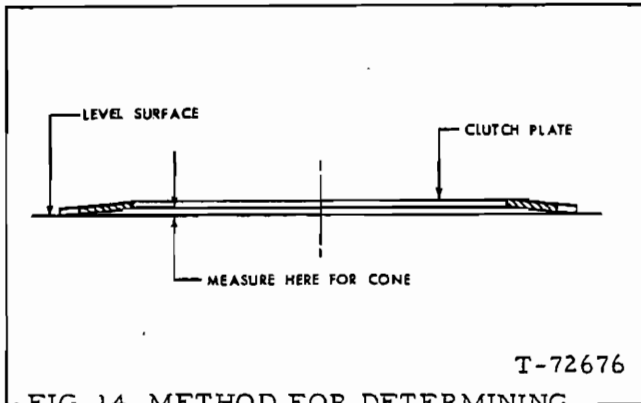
METHOD FOR DETERMINING CONE OF CLUTCH PLATE
